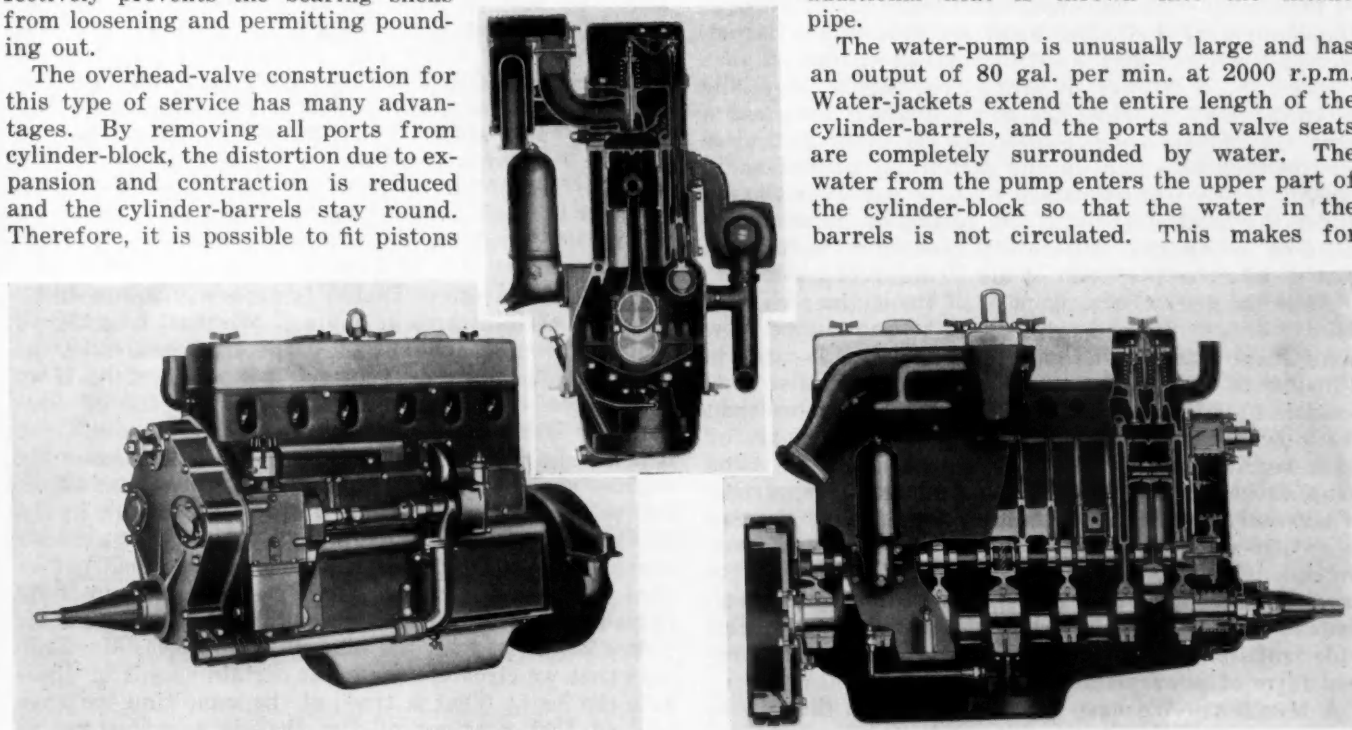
MODEL 20-R CONTINENTAL MOTOR-TRUCK ENGINE
